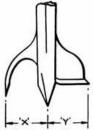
The Centre-Bit: Dimension "X" is the radius of the hole cut, and must never become less, by sharpening, than dimension "Y."
